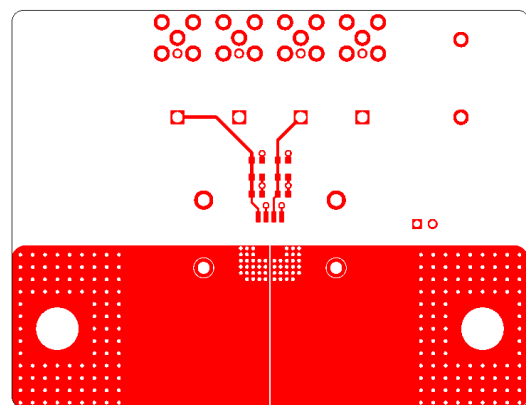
LC/LZ PCB Layout Reference View Without Vias-in-Pad
